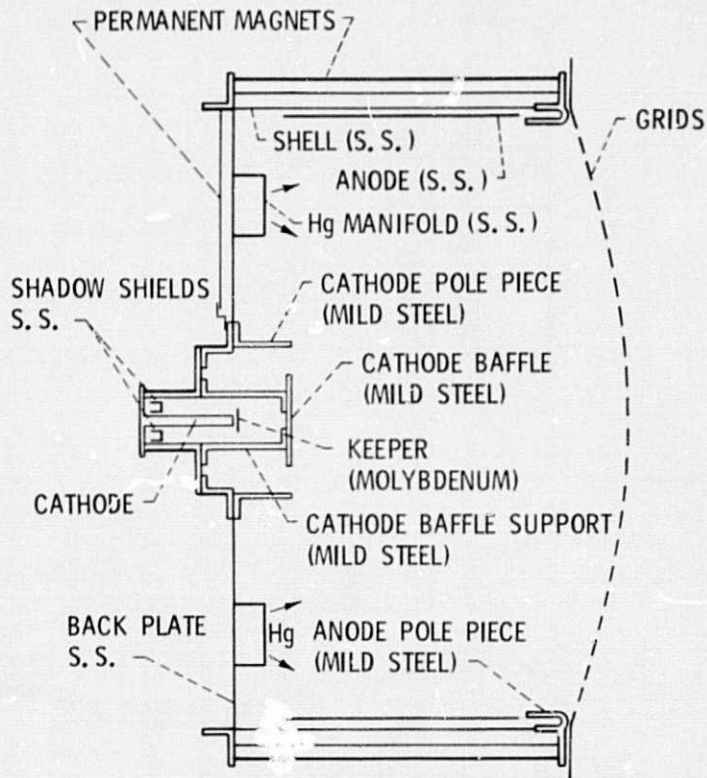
Cross sectional view of a modified "400 series" 30 cm diameter thruster.
